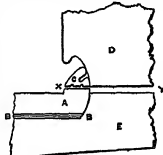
A, steel facing plate; B, copper discs; C, steel Broadwell ring; D, body of gun; E, wedge; X, interior of gun; Y, exterior of gun
